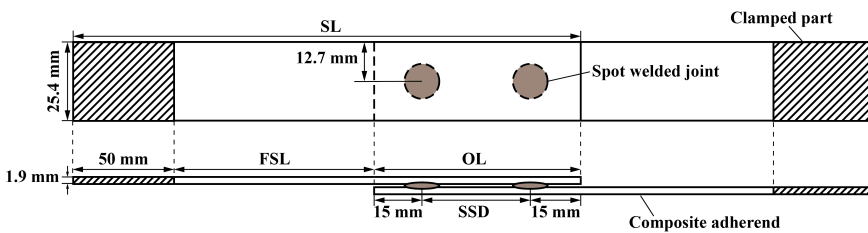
Schematic of the generic configuration of multi-spot welded single-lap shear joint specimen in this study. Dimensions are not to scale. Abbreviations are indicated in Table 5.1 and 5.2.
